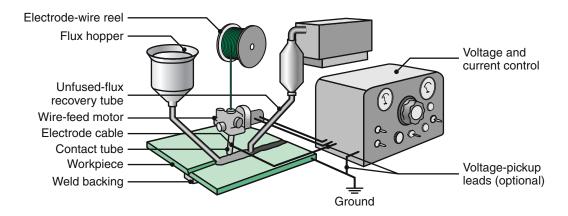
Schematic illustration of the submerged-arc welding process and equipment. The unfused flux is recovered and reused.
